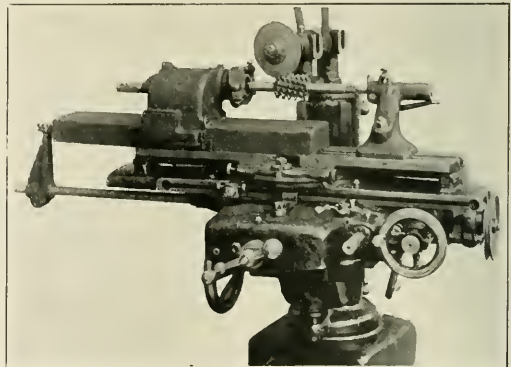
Attachment as Used for Grinding Spiral Hobs
